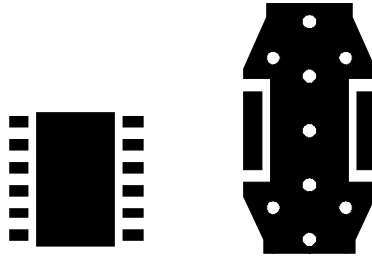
Standard footprint for a 12 pin DFN package to the left. Modified footprint used for the circuit to the right.
